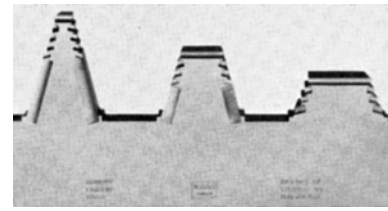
Special rack cutters for the fast, rough cutting of large gears. (Courtesy of Maag Gear Wheel Co., Zurich, Switzerland.)
